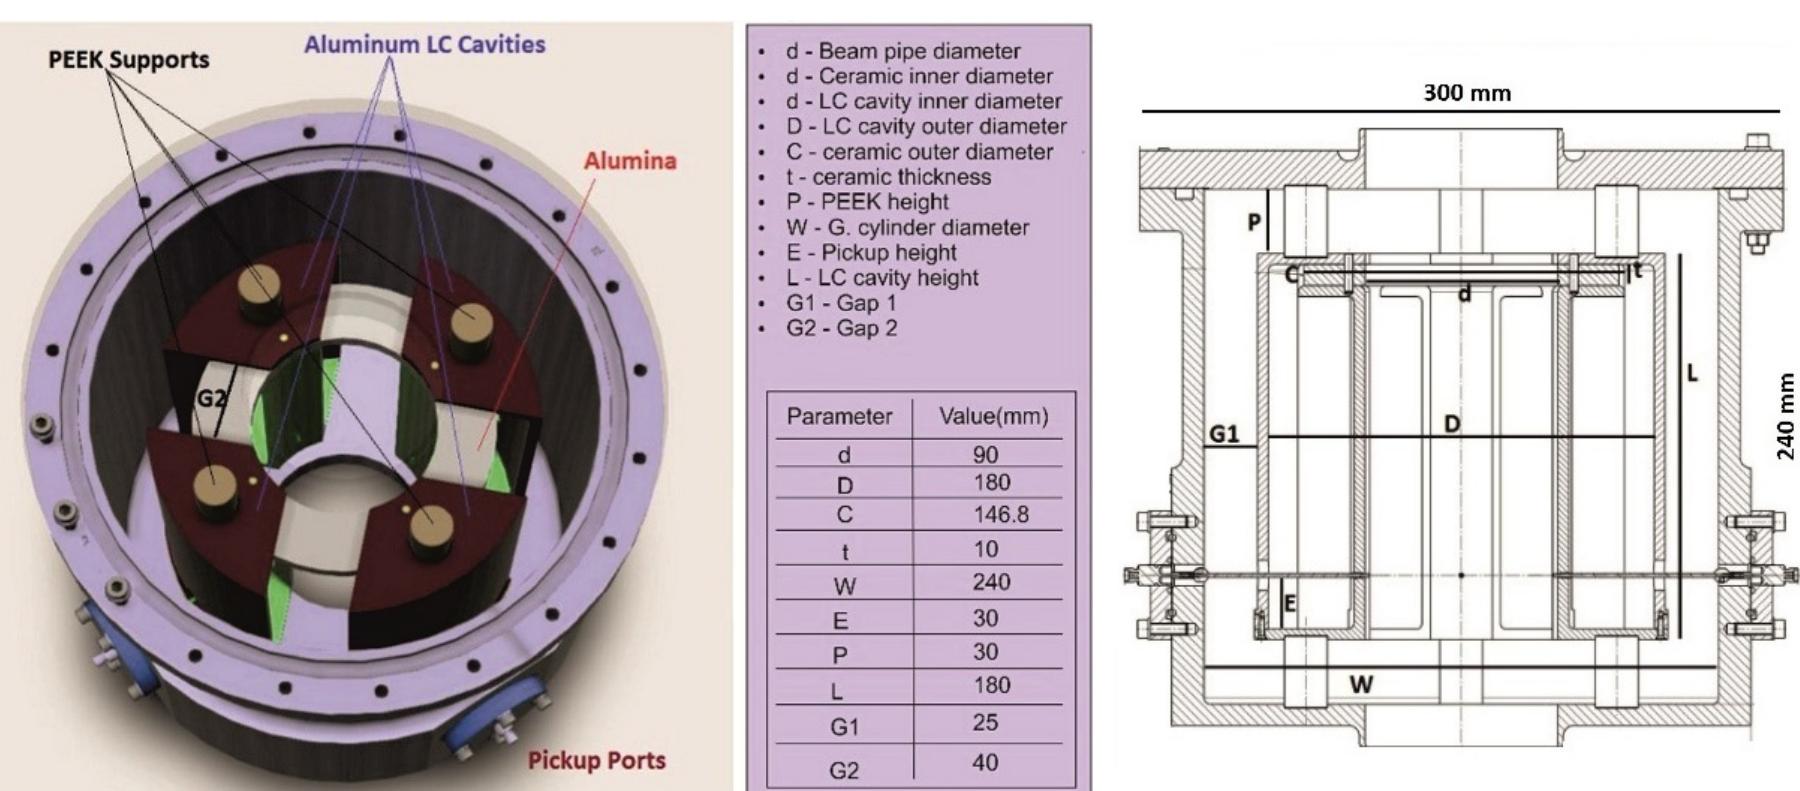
Cavity BPM geometry. Marked are the important dimensions.
